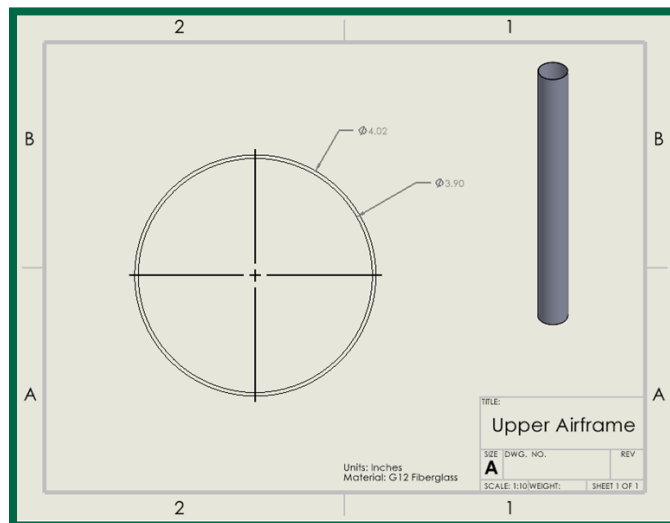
Airframe Cross-Section View (Solidworks Drawing).
